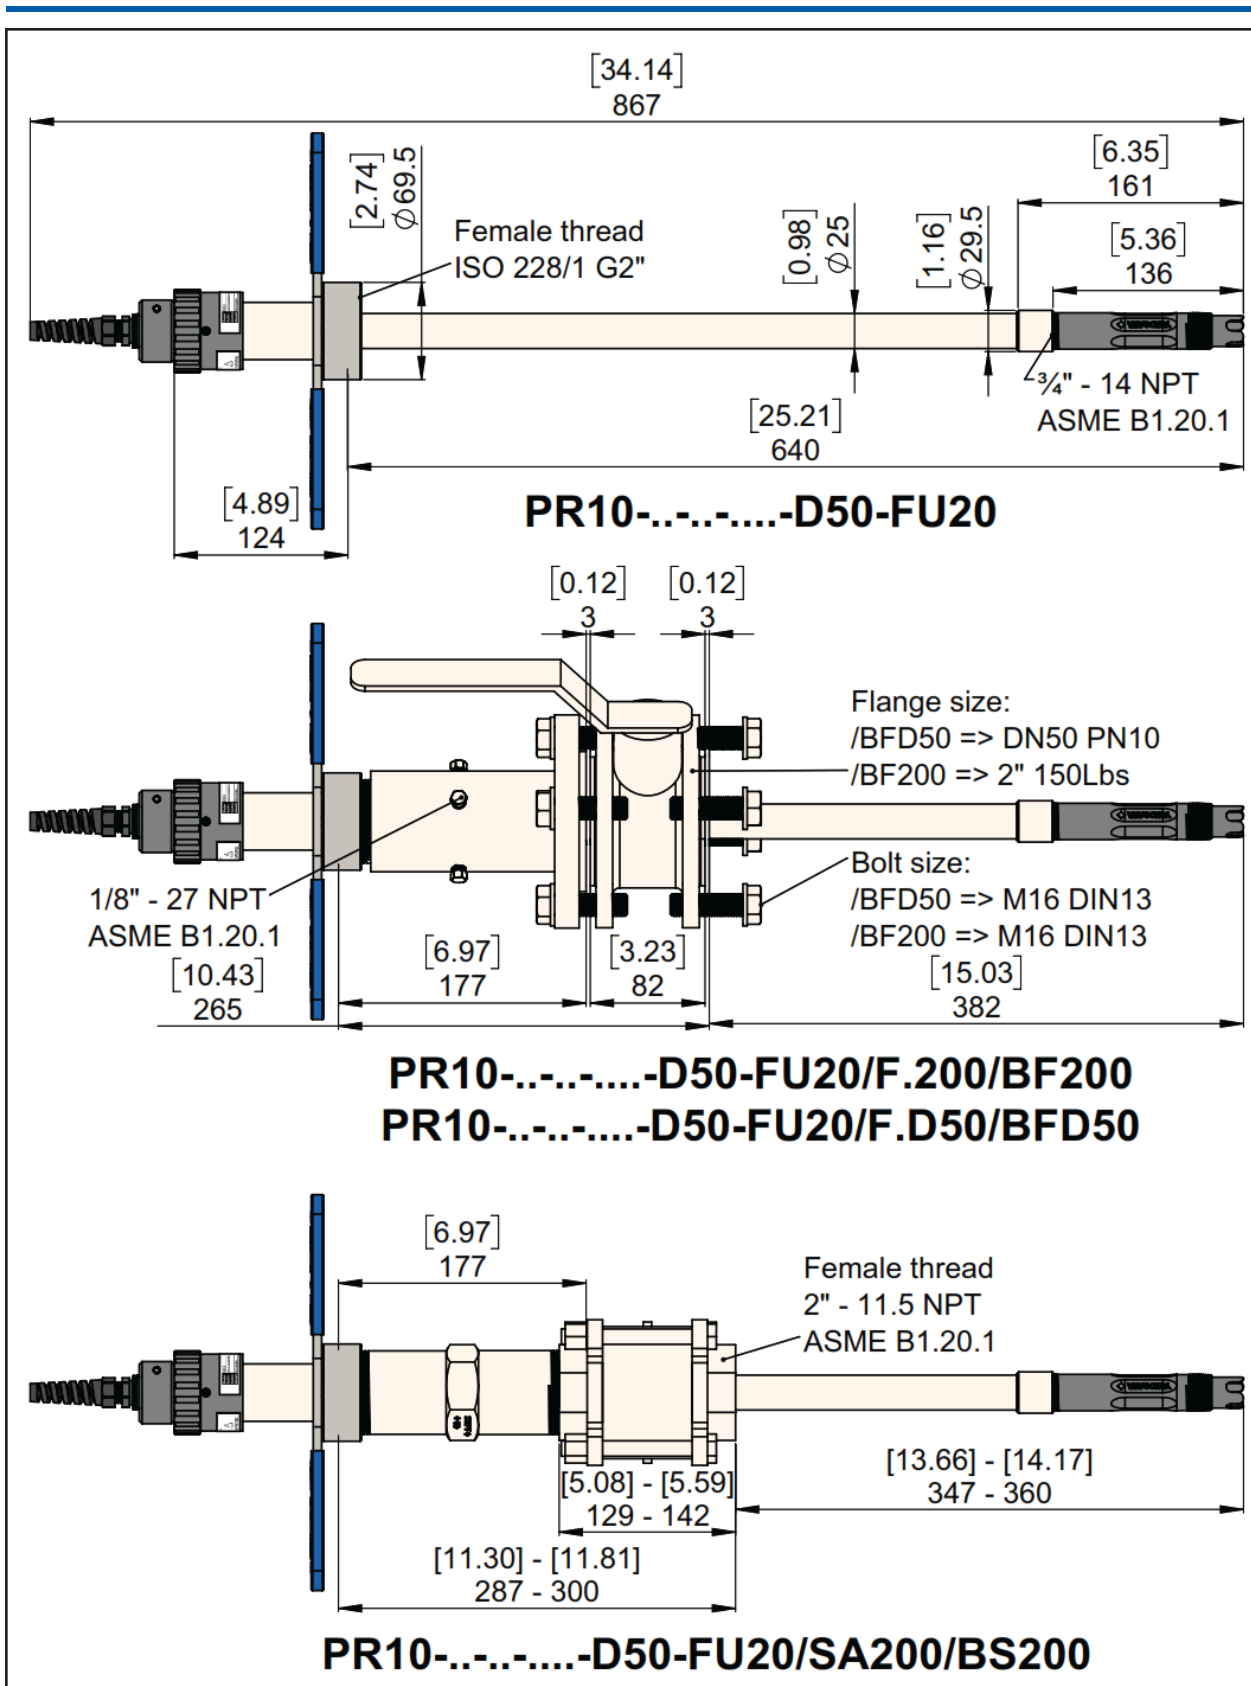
Dimensional drawing PR10...-D50 with mounted FU20 sensor - units in mm [inch]
